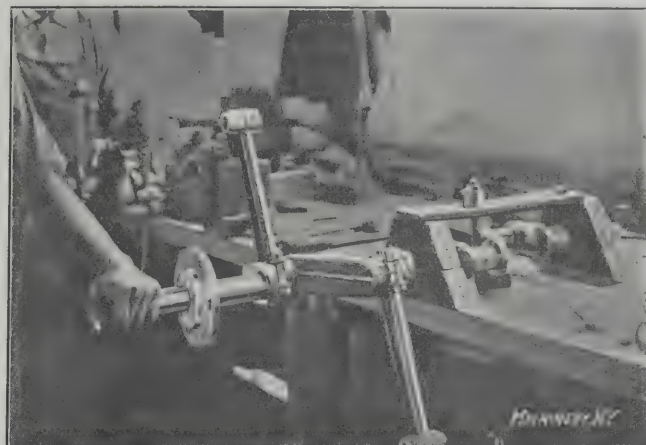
Bench Clamps for Holding Cranks while Fitting the Connecting-rods
